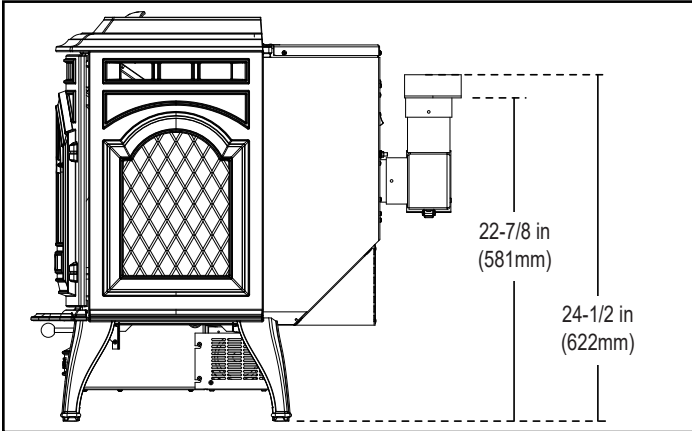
Side View with TPVNT-6 and 811-0720
